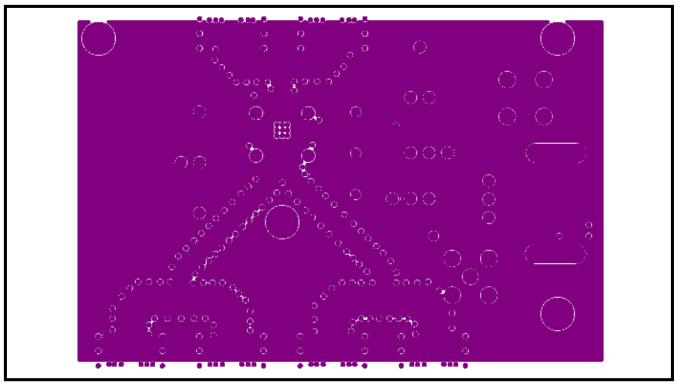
MAX3942 EV Kit PC Board Layout—Power Plane
